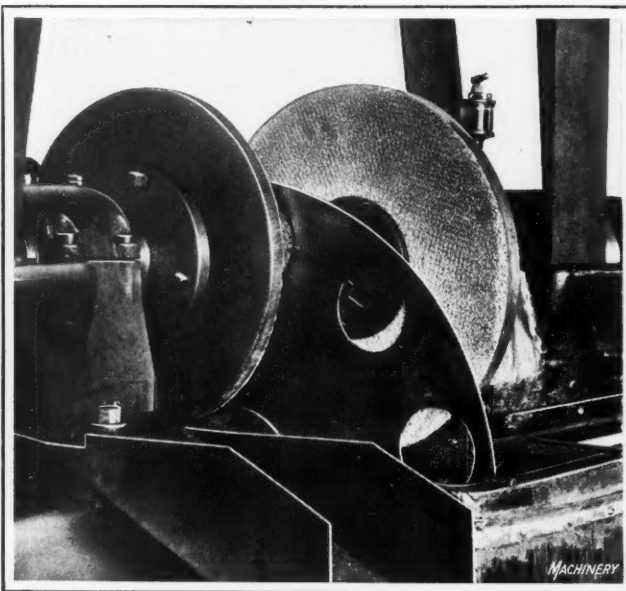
View showing the Offset Relation of the Grinding Wheels and also the Work-carrier
